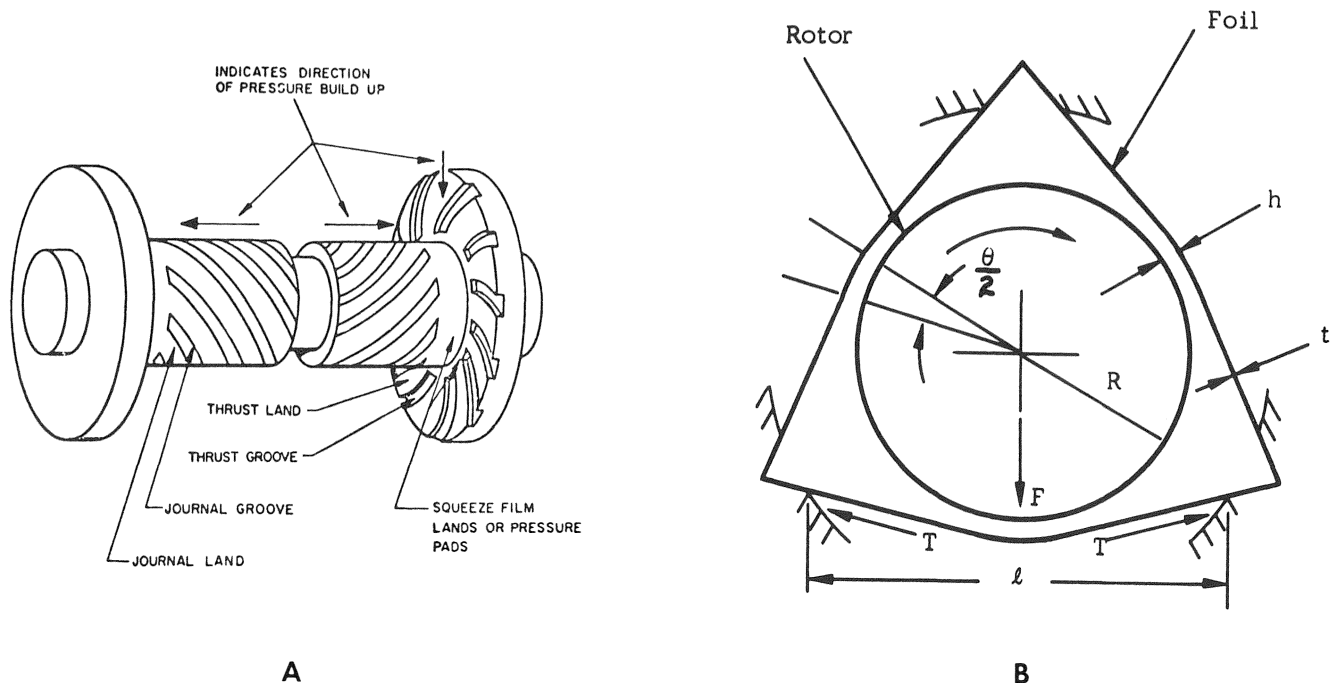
(a) Spiral Groove Bearing, (b) Complaint Surface Bearing.
